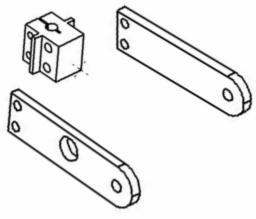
Twist Motor Shaft Clamp - Eng. Drawing
